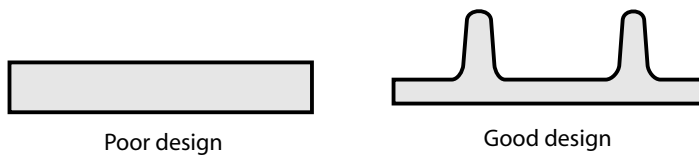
shows a nonuniform wall section that should be replaced with a thin uniform wall having the same strength of the original heavy wall section.
